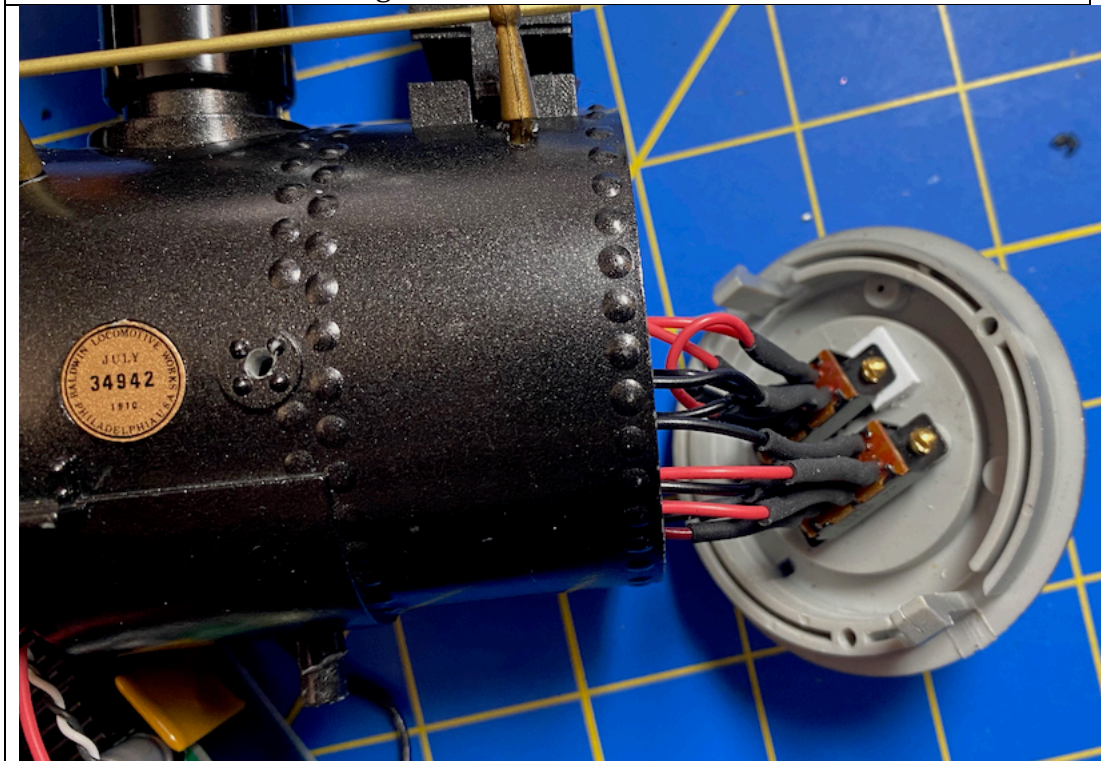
Routing of the DPDT Switches and Smoke Box Door
